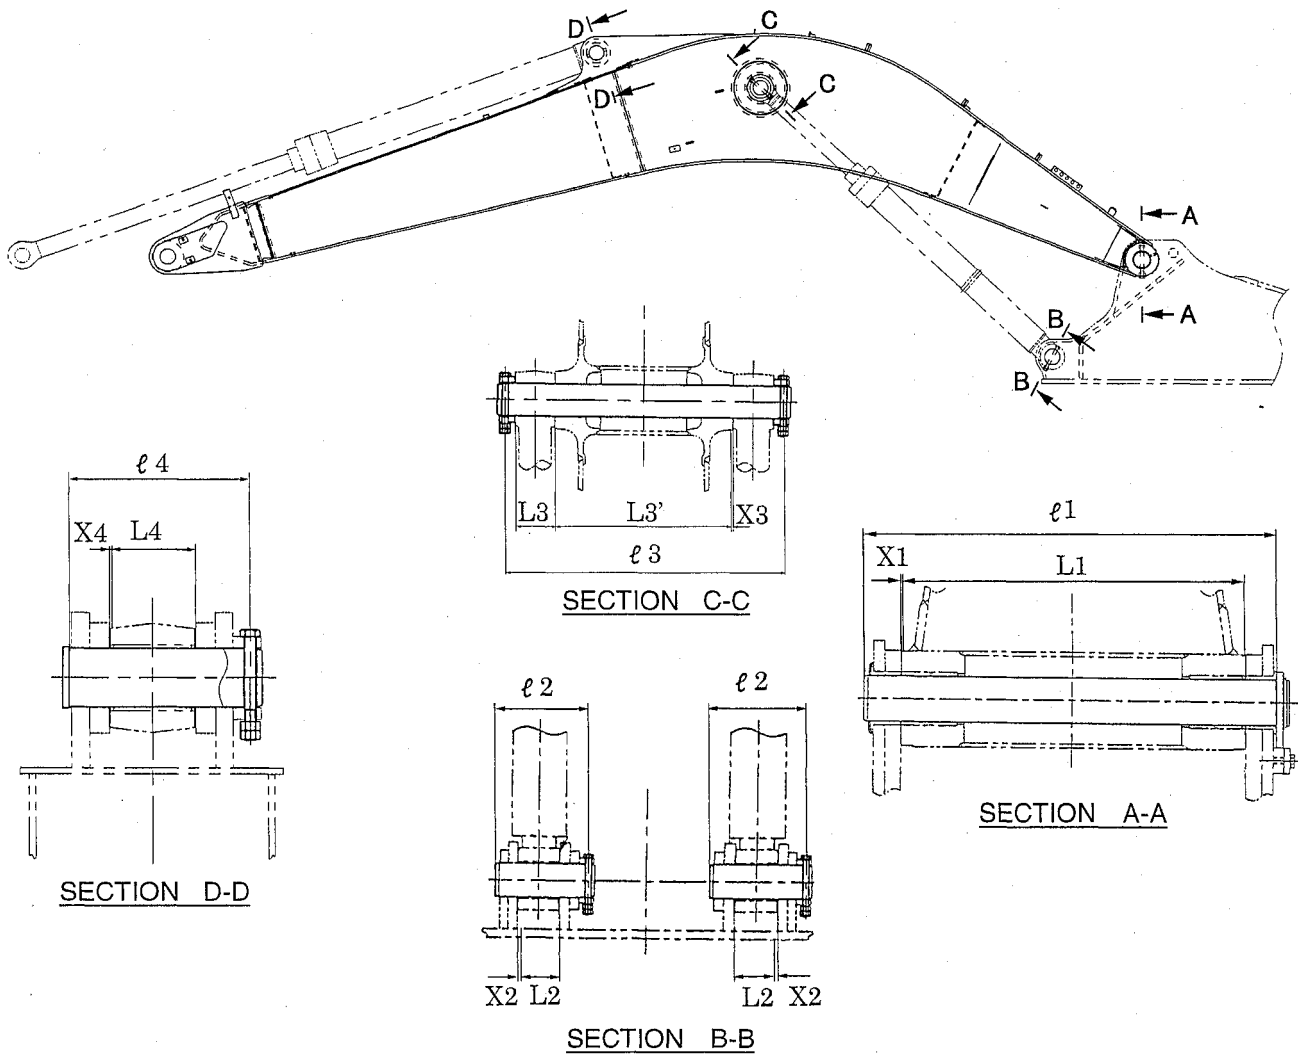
Clearance in thrust direction on the boom cylinder installation section
